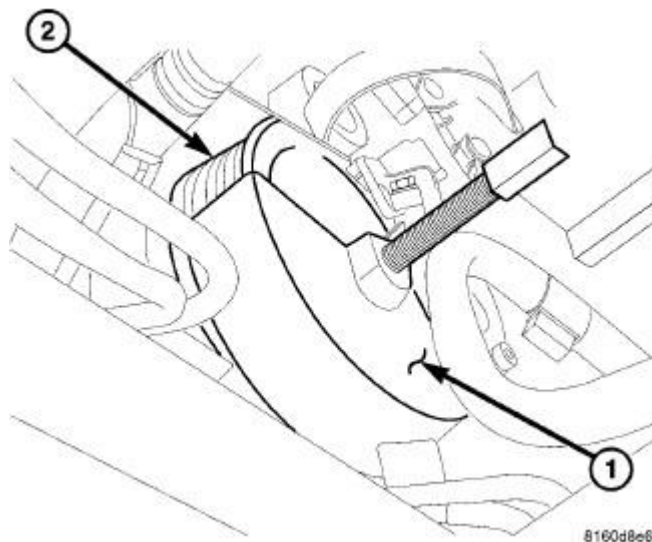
CRANKSHAFT DAMPER REMOVER 9544
